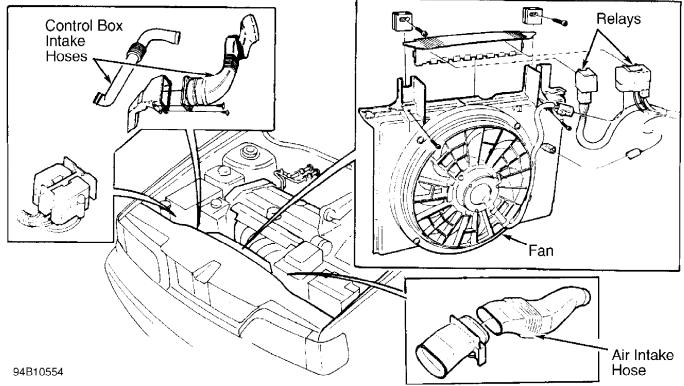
Removing Cooling Fan Components Courtesy of Volvo Cars of North America.
